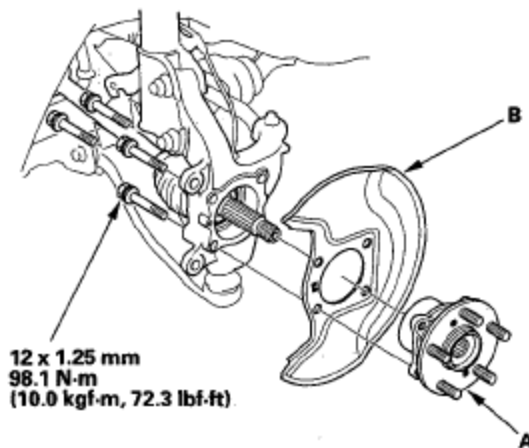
Identifying Hub Bearing Unit And Splash Guard From Knuckle
